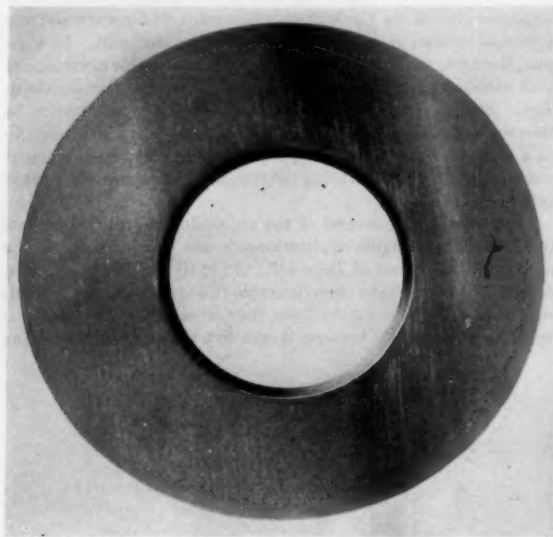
SECTION OF TYPE 347 MAIN STEAM PIPE. DEFECT AT RIGHT ( $6\frac{3}{4}$  IN. OD)
